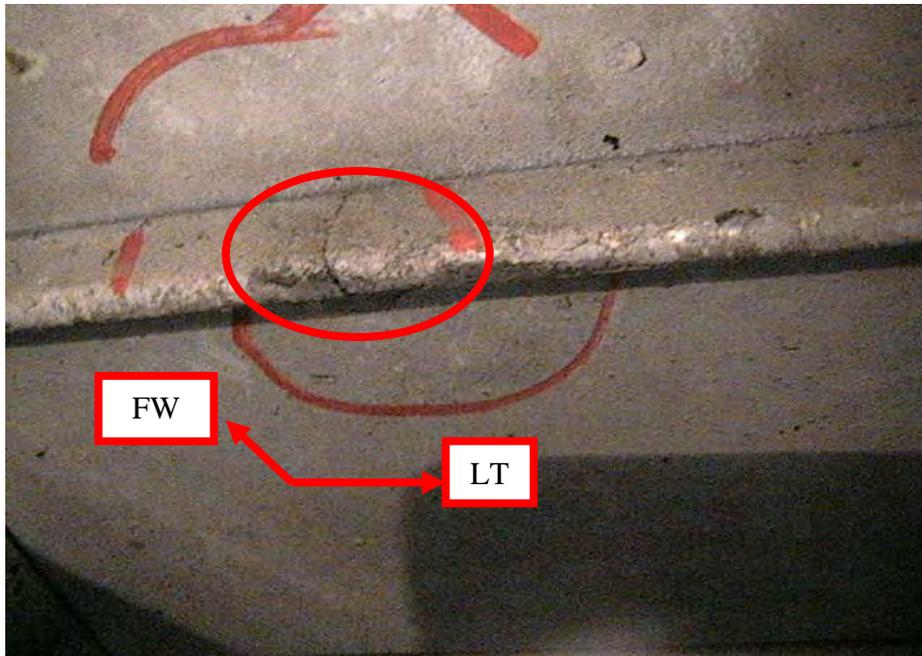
Damaged and Cracked Right Wing Stringers in the Main Gear Wheel Well FS 50, WL 16, and RWS 39.5 to RWS 49
